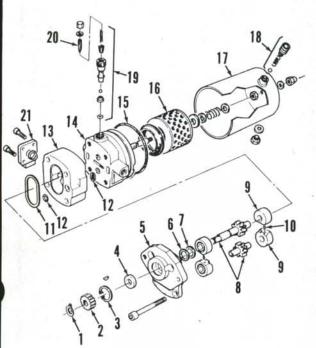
Exploded view of Aero-Quip power steering pump used on some models.
